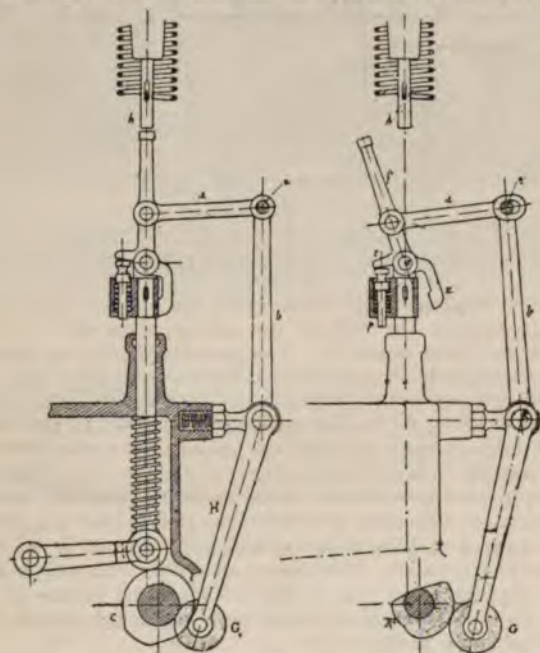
VALVE MECHANISM OF ROCHET MOTORS.
